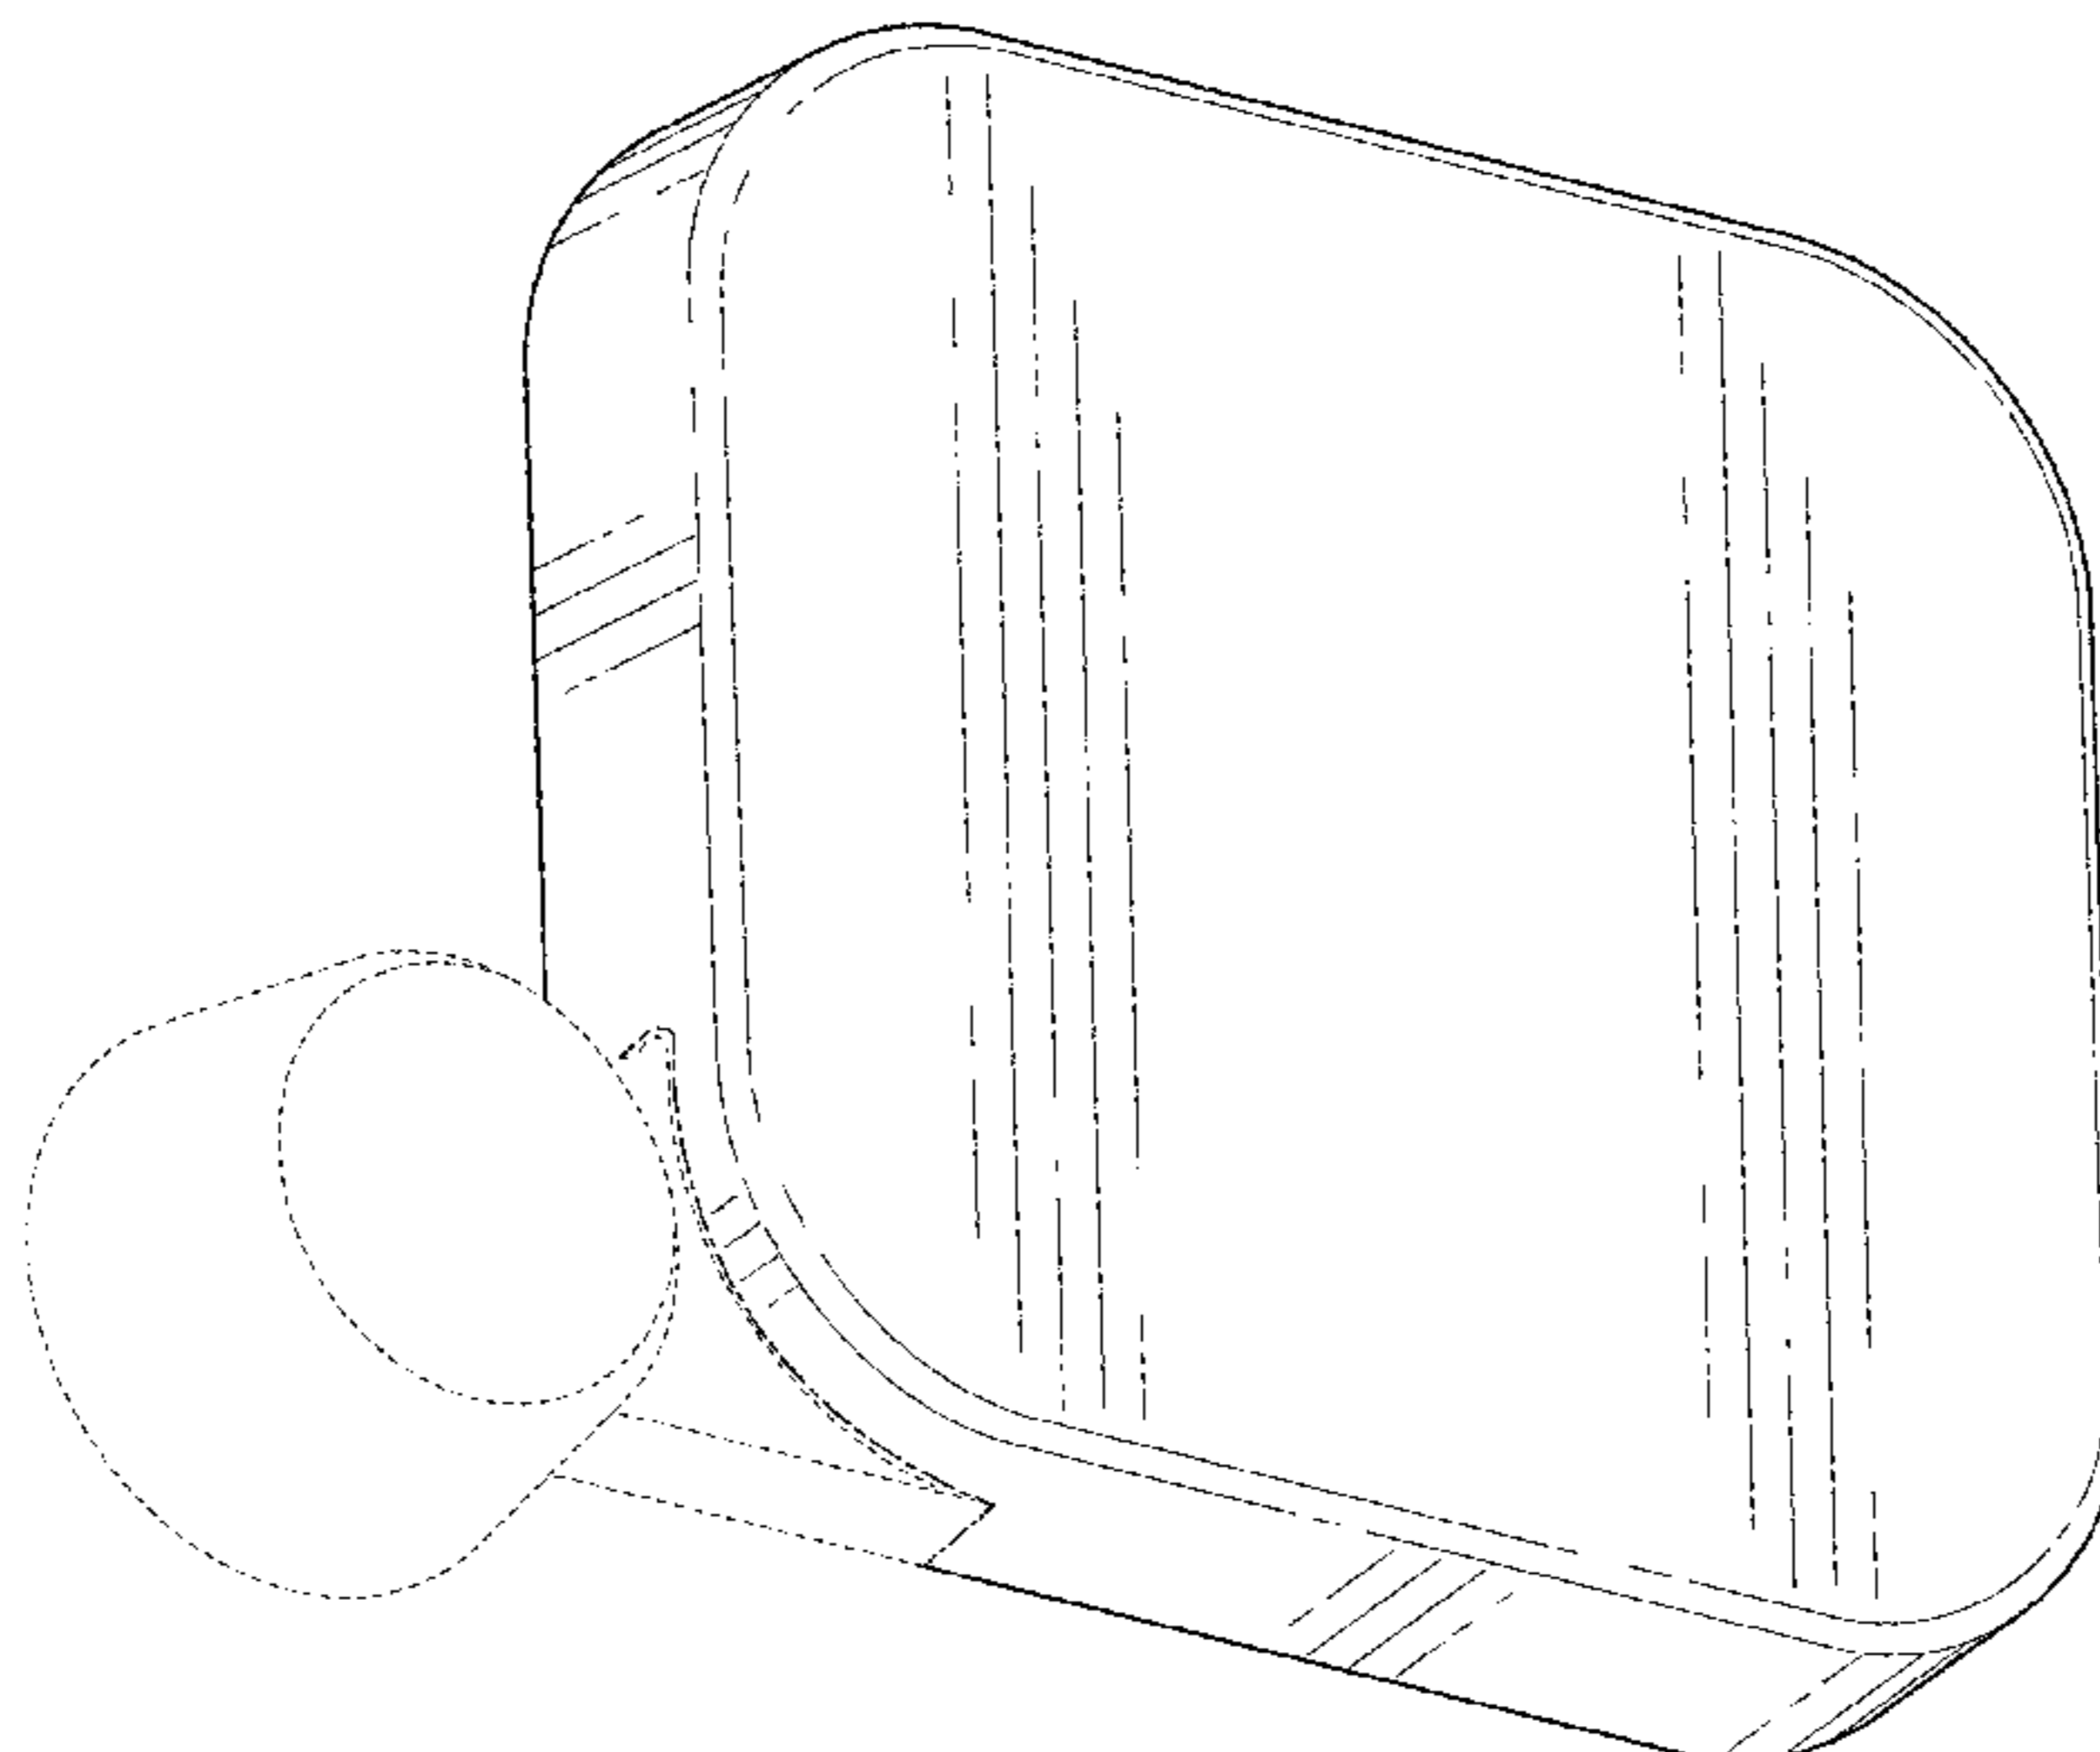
is a front, bottom and left side perspective view of a lens cover showing our new design;
